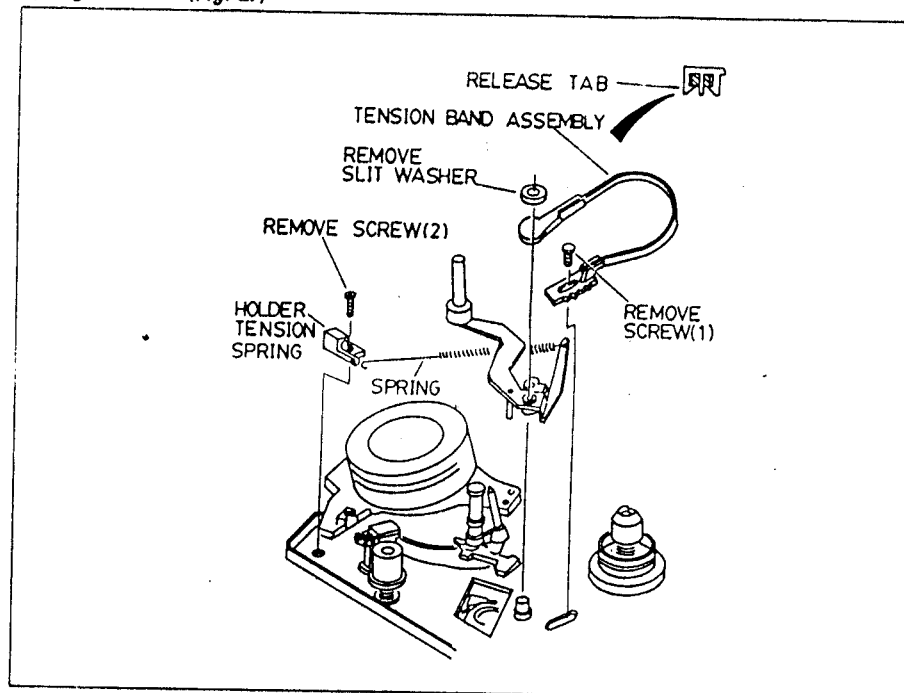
Arm Tension Assembly, Tension Band Assembly and Holder Tension Spring Removal
